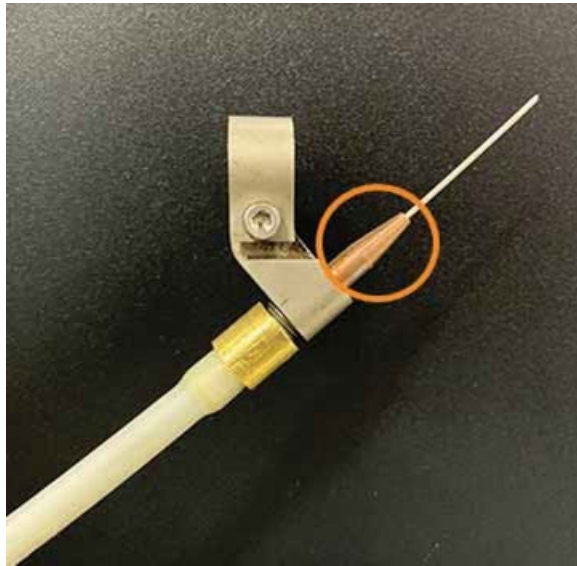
Screw the Contact Tip back into the Weld Head Adapter
